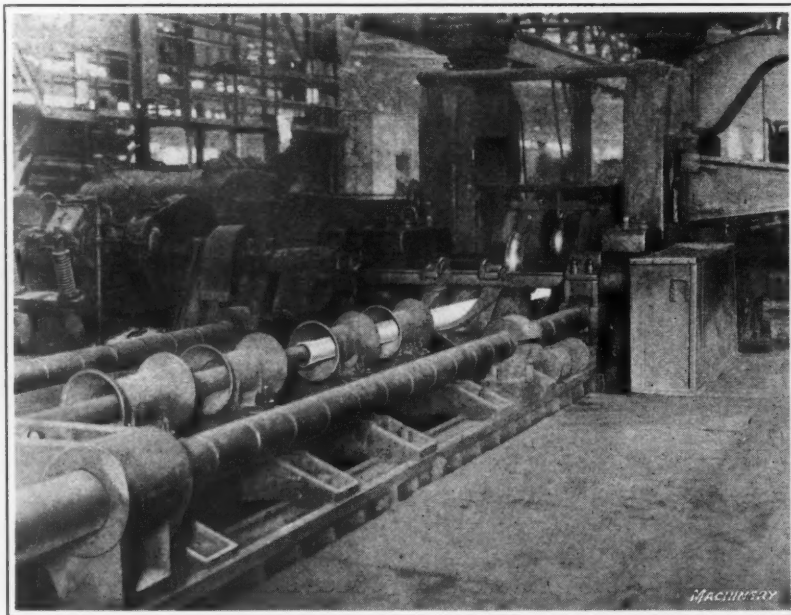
Rolling Mill which lengthens the Rough Tube and reduces its Diameter
